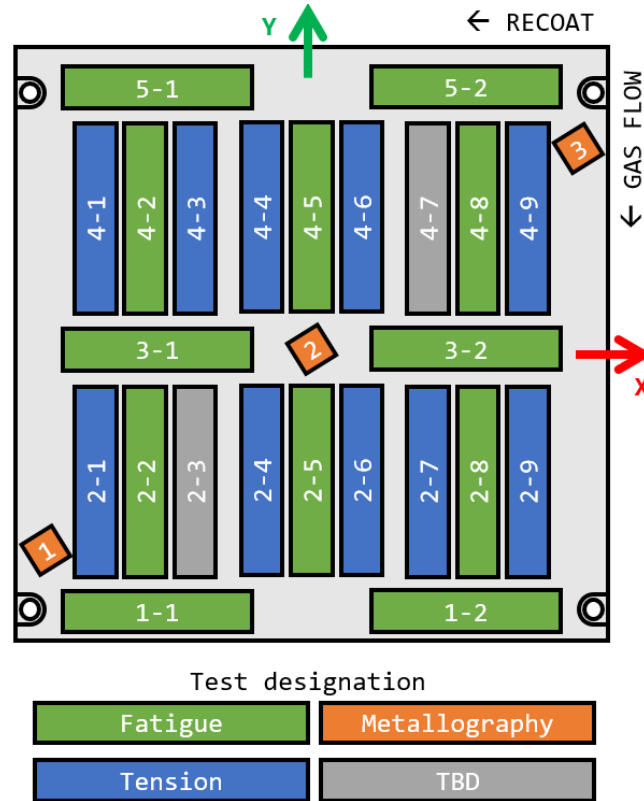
Build layout for all builds. Build direction is +Z, or out of the page. Note that specimens 3-1, 4-1, 4-2, and 5-1 from build A4 did not build properly and were not subsequently processed nor analyzed or tested.
